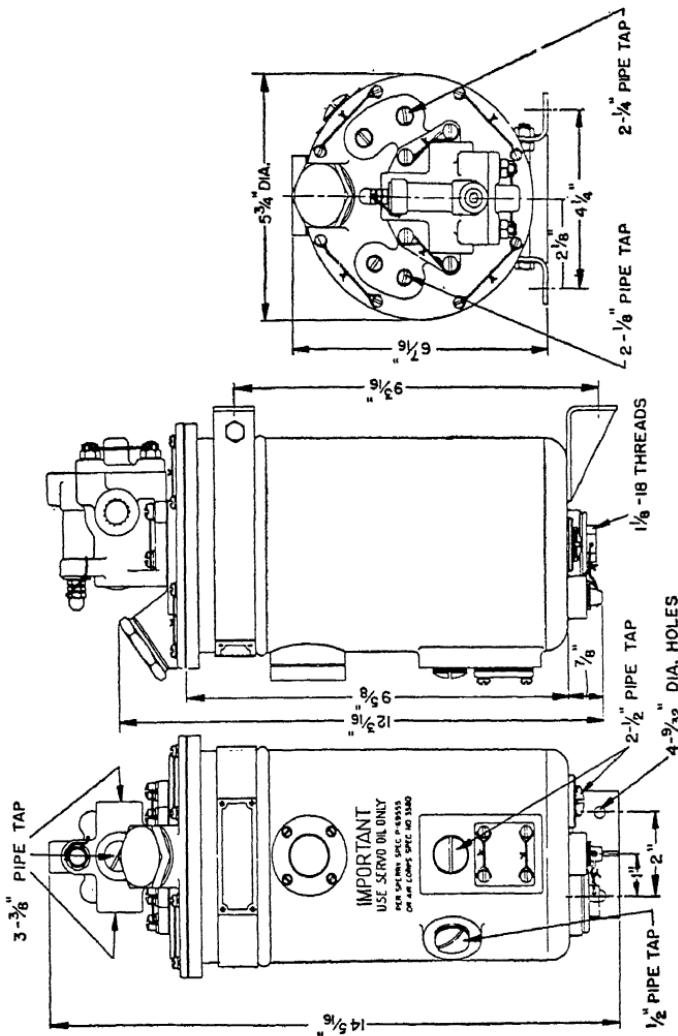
Principal Dimensions of the Oil Sump and Pressure Regulator
